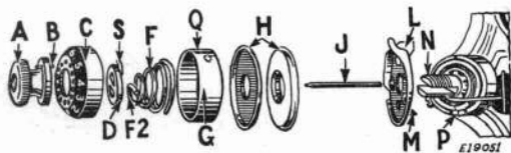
NEEDLE THREAD TENSION DISASSEMBLED
